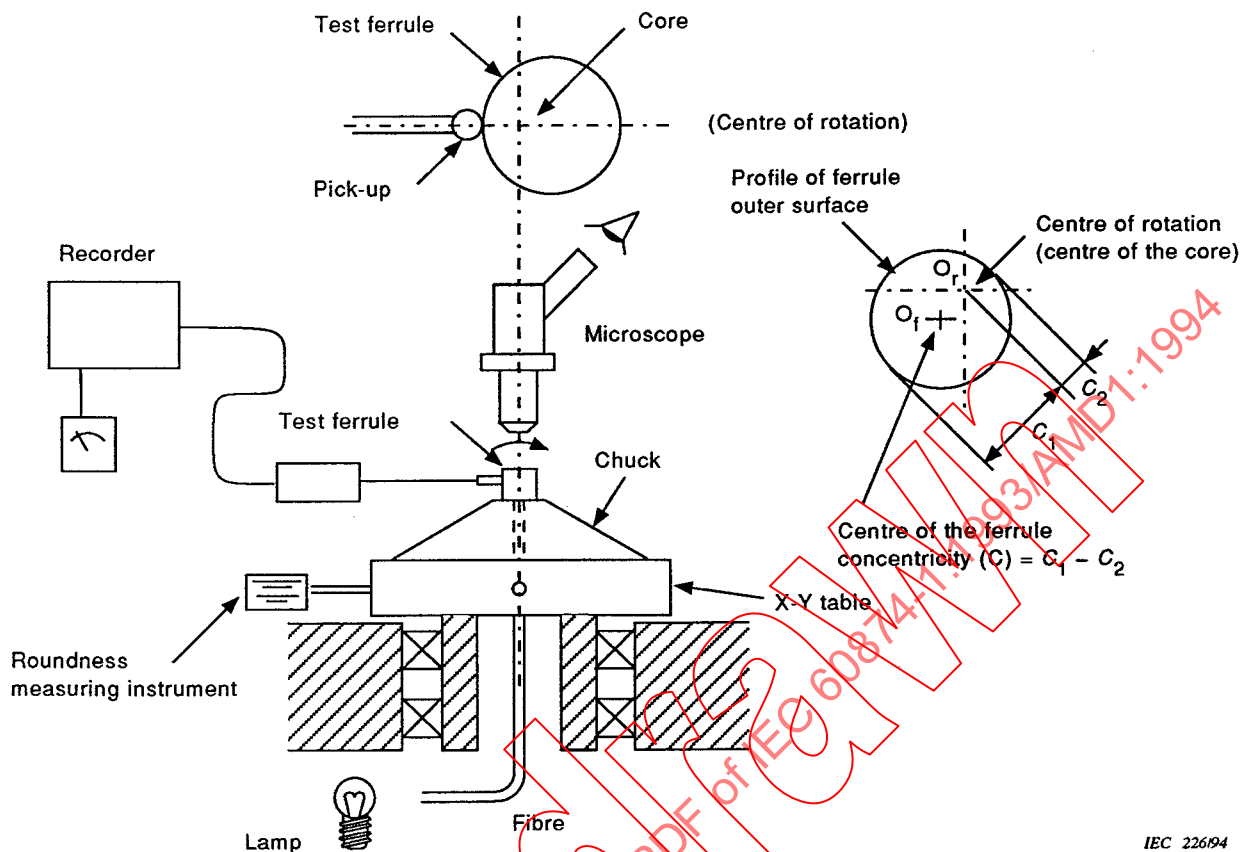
Example of set-up for concentricity measurement (method 2) (for assembled ferrules)
